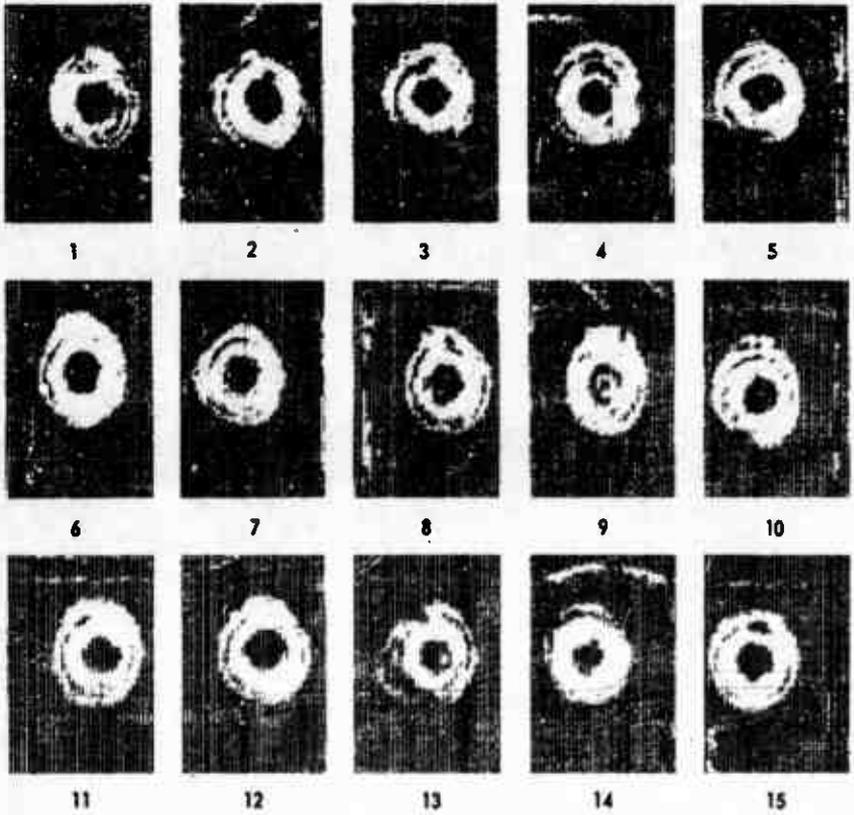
C-Scan Record of Series 7 Welds.
